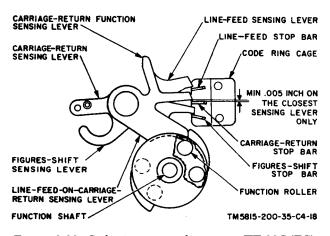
Code-ring cage adjustment (TT-98C/FG).
